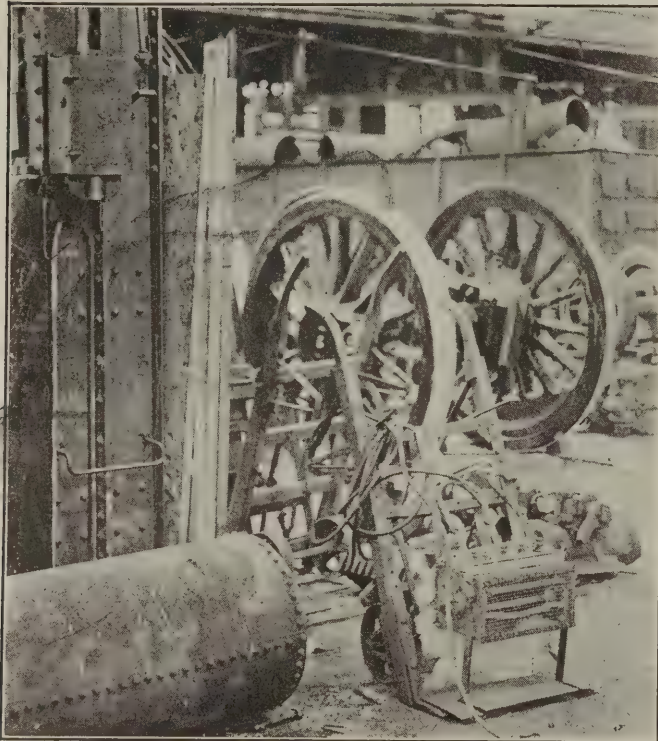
Portable Nichrome Variable Resistor for Welding
